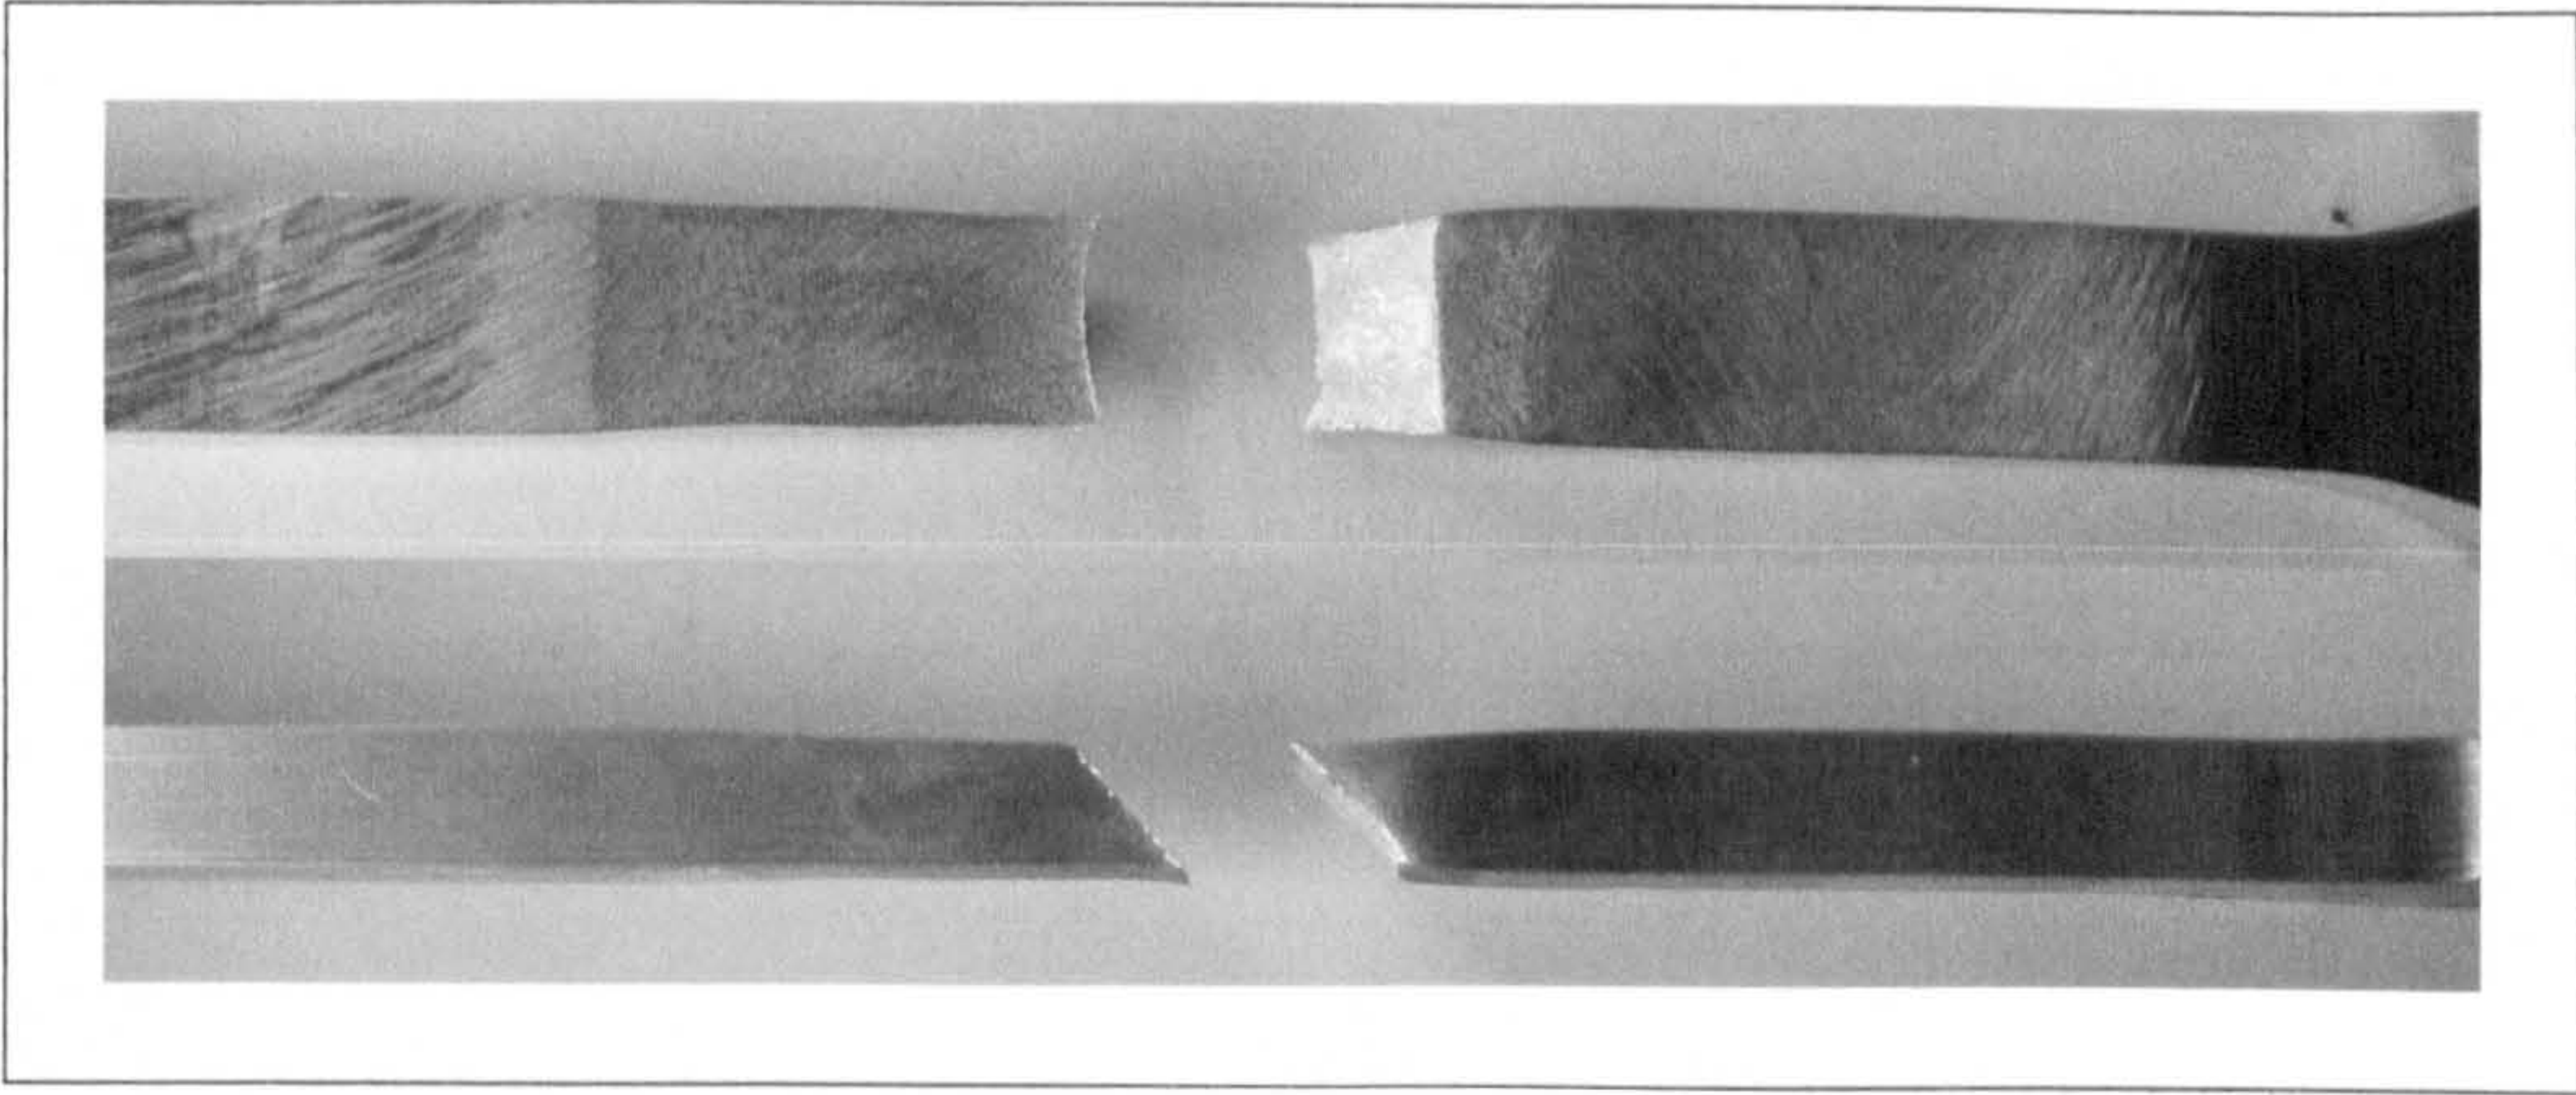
Shear failure and necking from monotonic uniaxial tensile testing of a FS DP welded AA 5383-H321.
